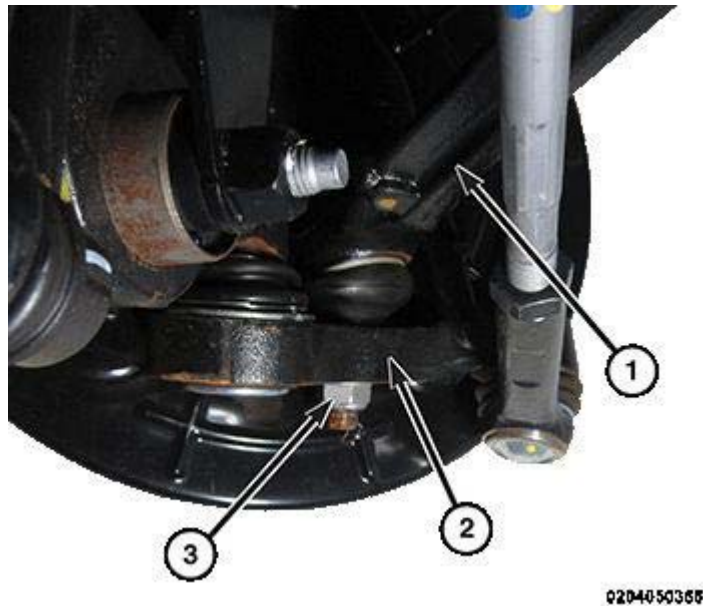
Knuckle & Tension Strut To Knuckle Nut
